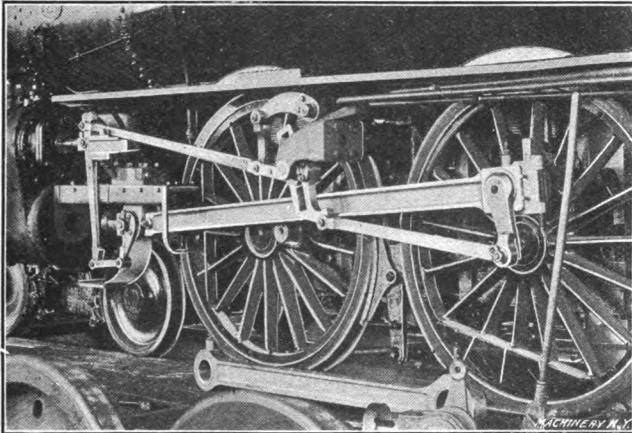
Design of Walschaerts Valve Gear used on Atlantic Type Engines
